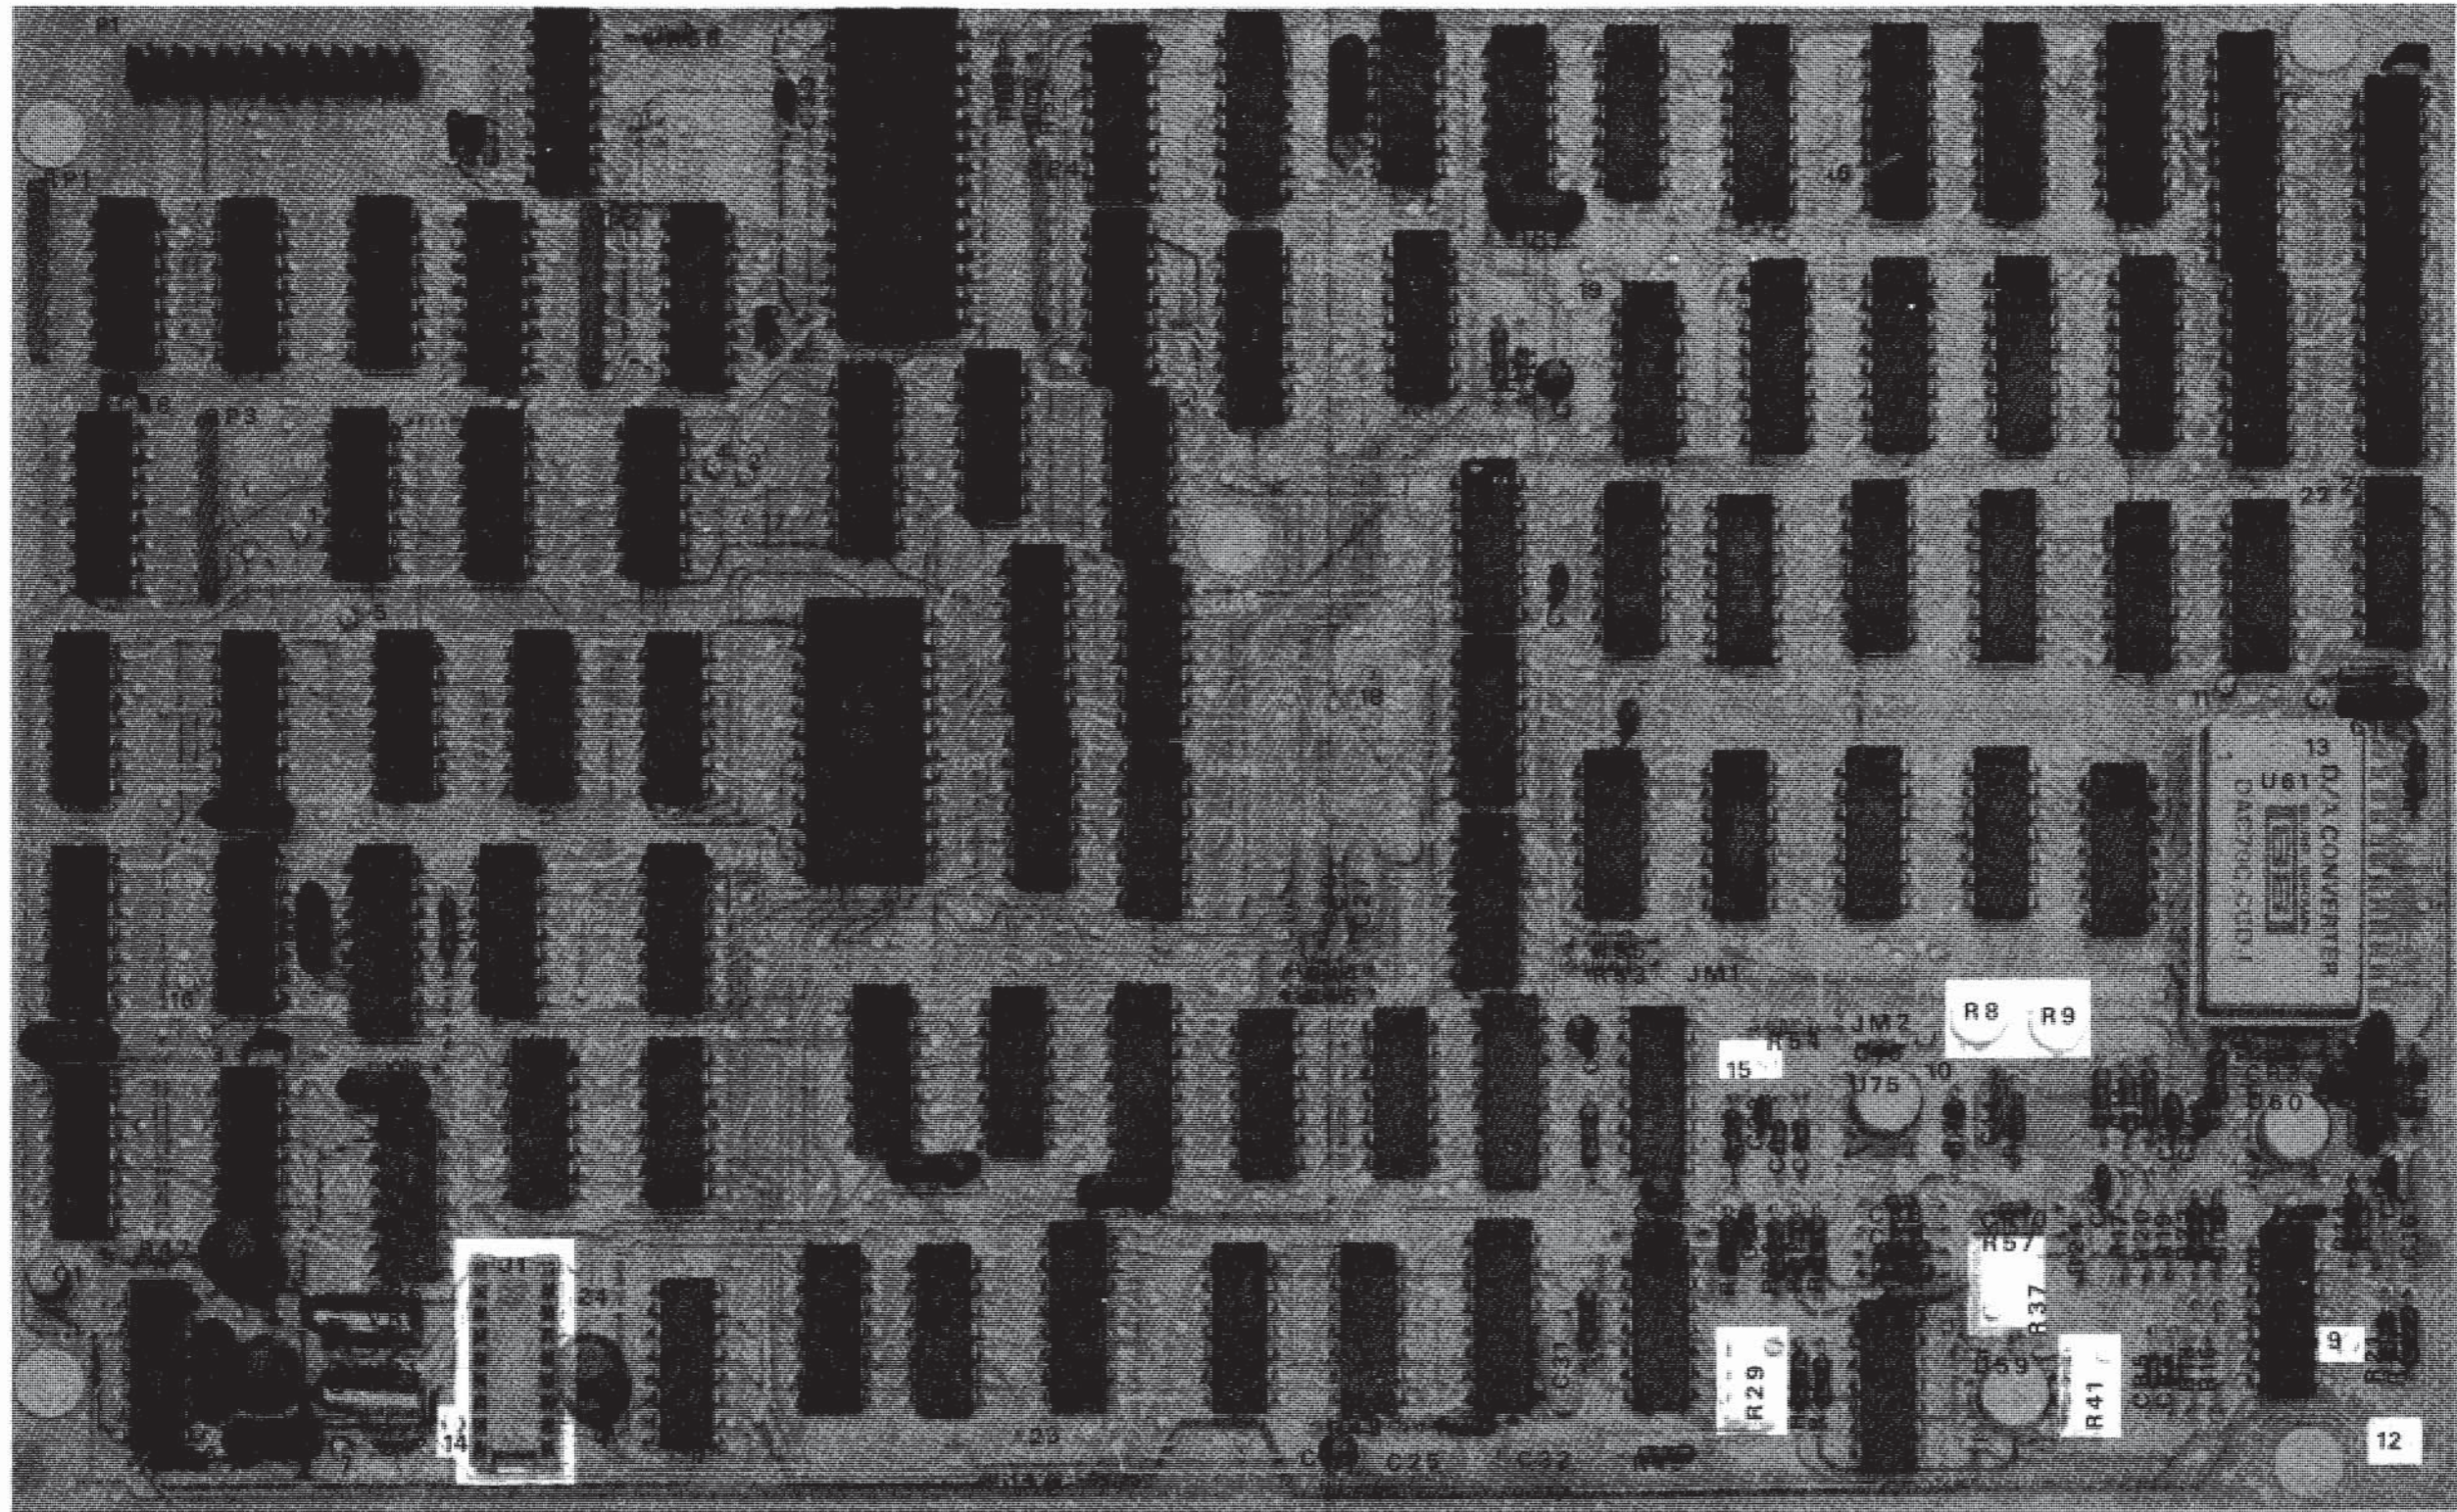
Locations of Test Points and Adjustments, A6 PCB
